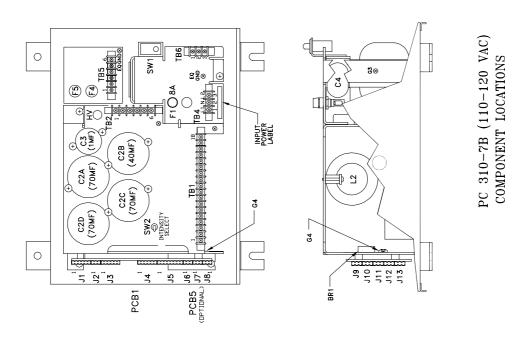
Power Converter Component Layout (PC 310-7B)
